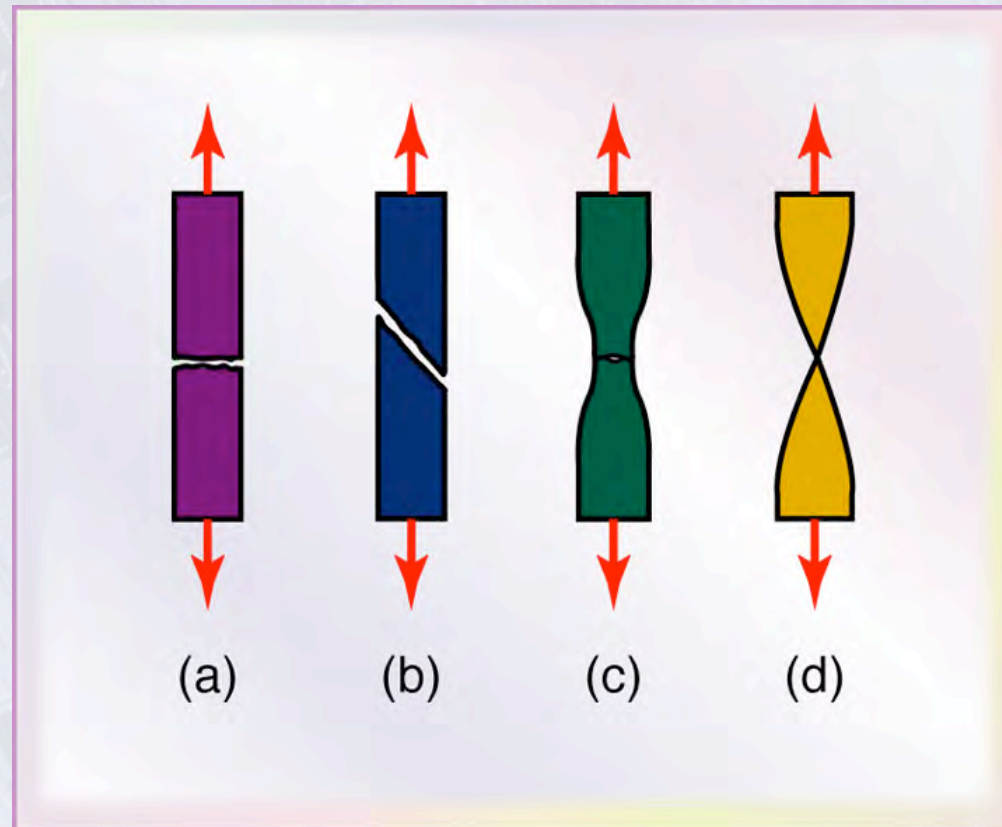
Schematic illustration of the types of fracture in tension: (a) brittle fracture in polycrystalline metals; (b) shear fracture in ductile single crystals – see also Fig 1.6a; (c) ductile cup-and-cone fracture in polycrystalline metals; (d) complete ductile fracture in polycrystalline metals, with 100% reduction of area.
